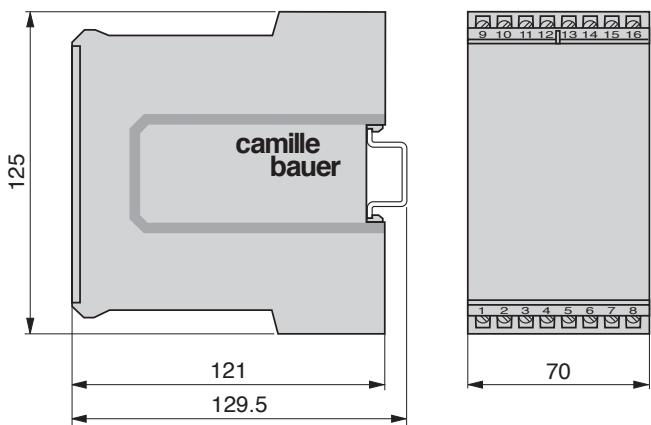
Housing type E16 clipped onto a top-hat rail EN 50 022, 35 × 15 mm or 35 × 7.5 mm.
